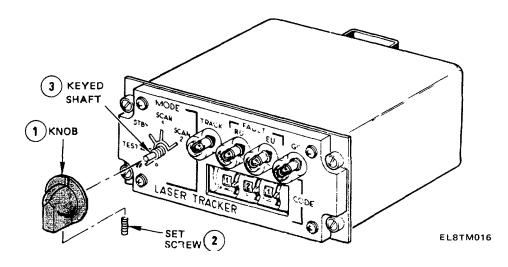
Removal and Replacement of Control Panel MODE Switch Knob.
